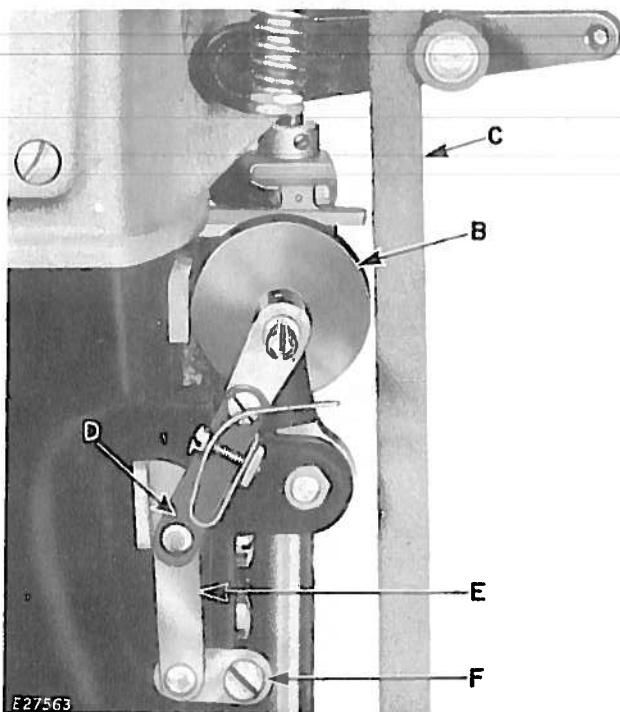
Adjusting Contact of Bobbin Winder Pulley with Machine Driving Belt.
